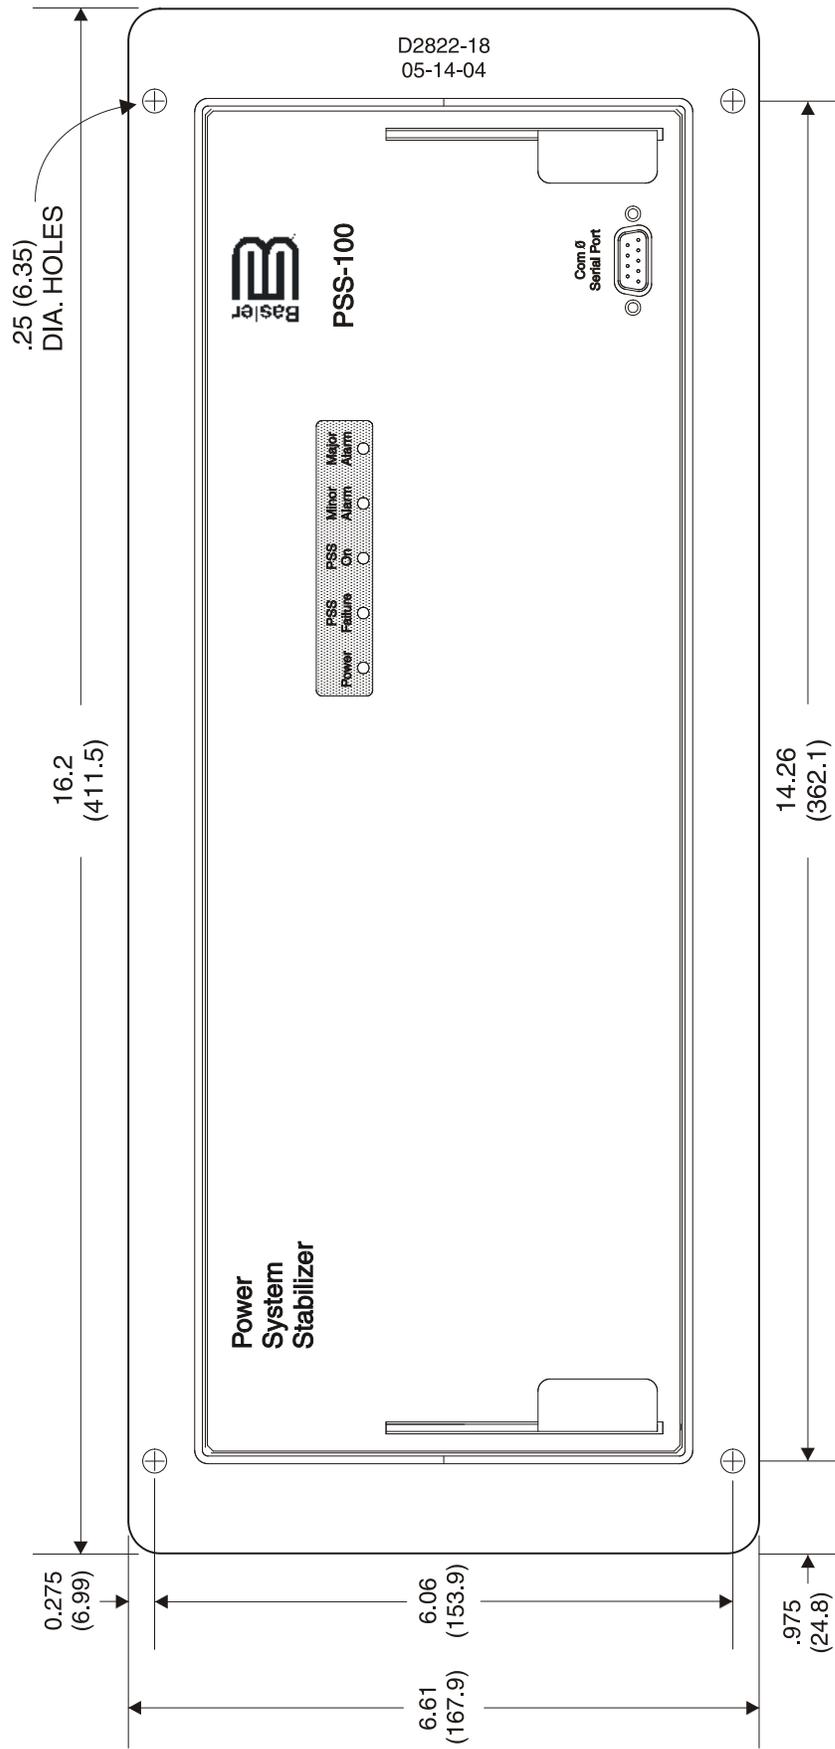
Panel Mount PSS-100 Outline Dimensions, Front View
